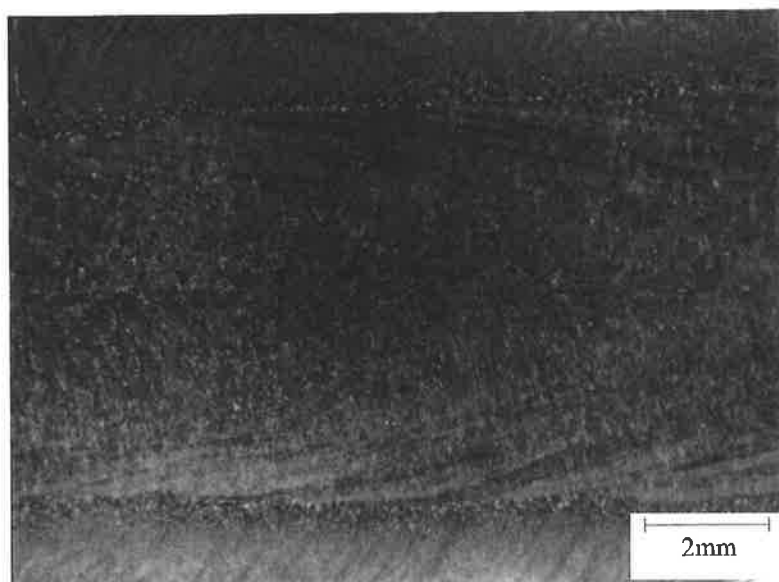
Longitudinal horizontal section of a weld made at 600mm/min and 193A (heat input equal to 0.56kJ/mm). In this weld the total number of hollow bead is 9 and the total length is 45mm.
